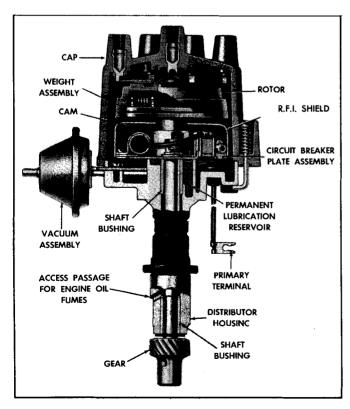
E-44 Cross Section of V-8 Distributor - Std.
